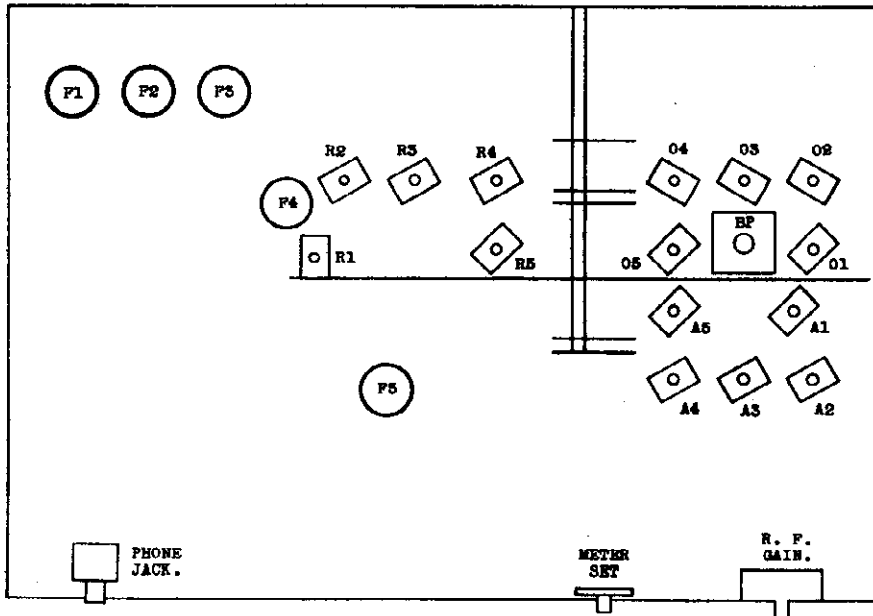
GENERAL LAYOUT AND LOCATION OF TRIMMER AND FILTERS FROM BOTTOM OF CHASSIS.
